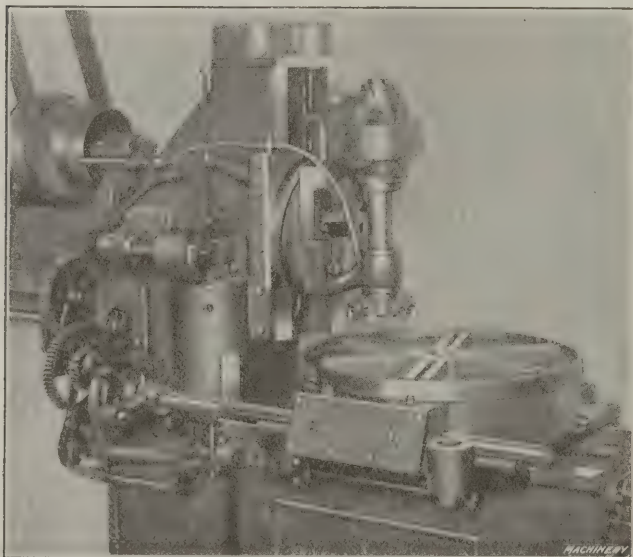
Gear-hobbing Machine arranged for Continuous or Circular Milling
